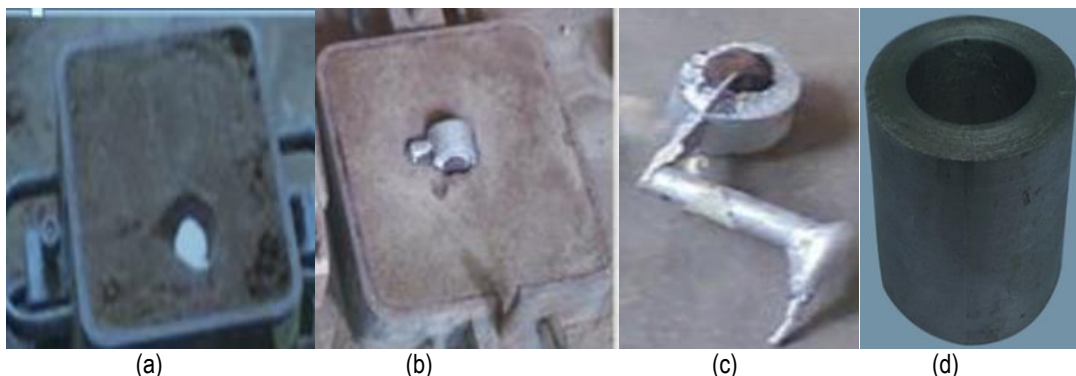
Green Moulding Process (a) Green mould flasks in closed position with solidified cast, (b) Green mould drag with cast, (c) Cast with fins and (d) Completed bushing
